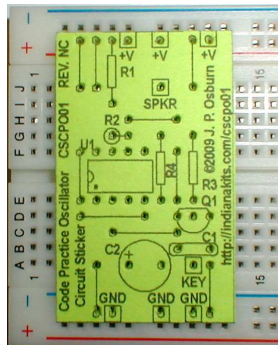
CSCPO01 Sticker on Solderless Breadboard
